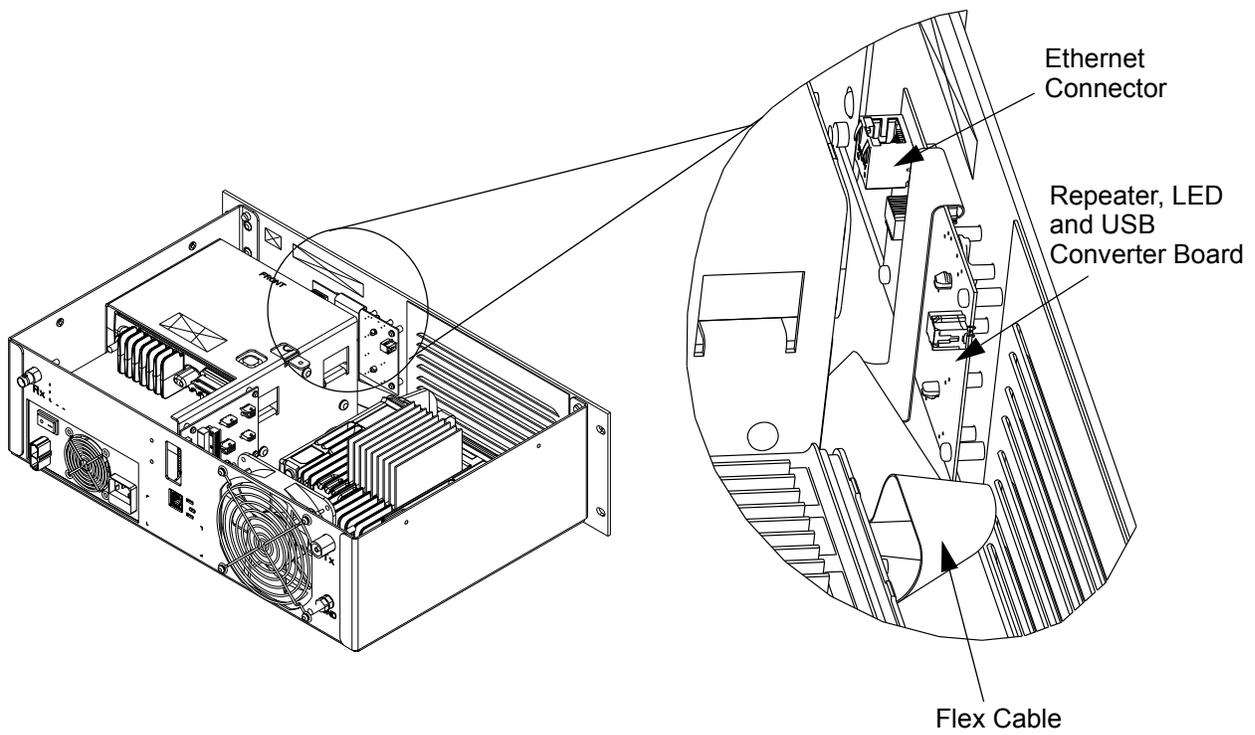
Disconnecting Ethernet Cable and Flex Cable
